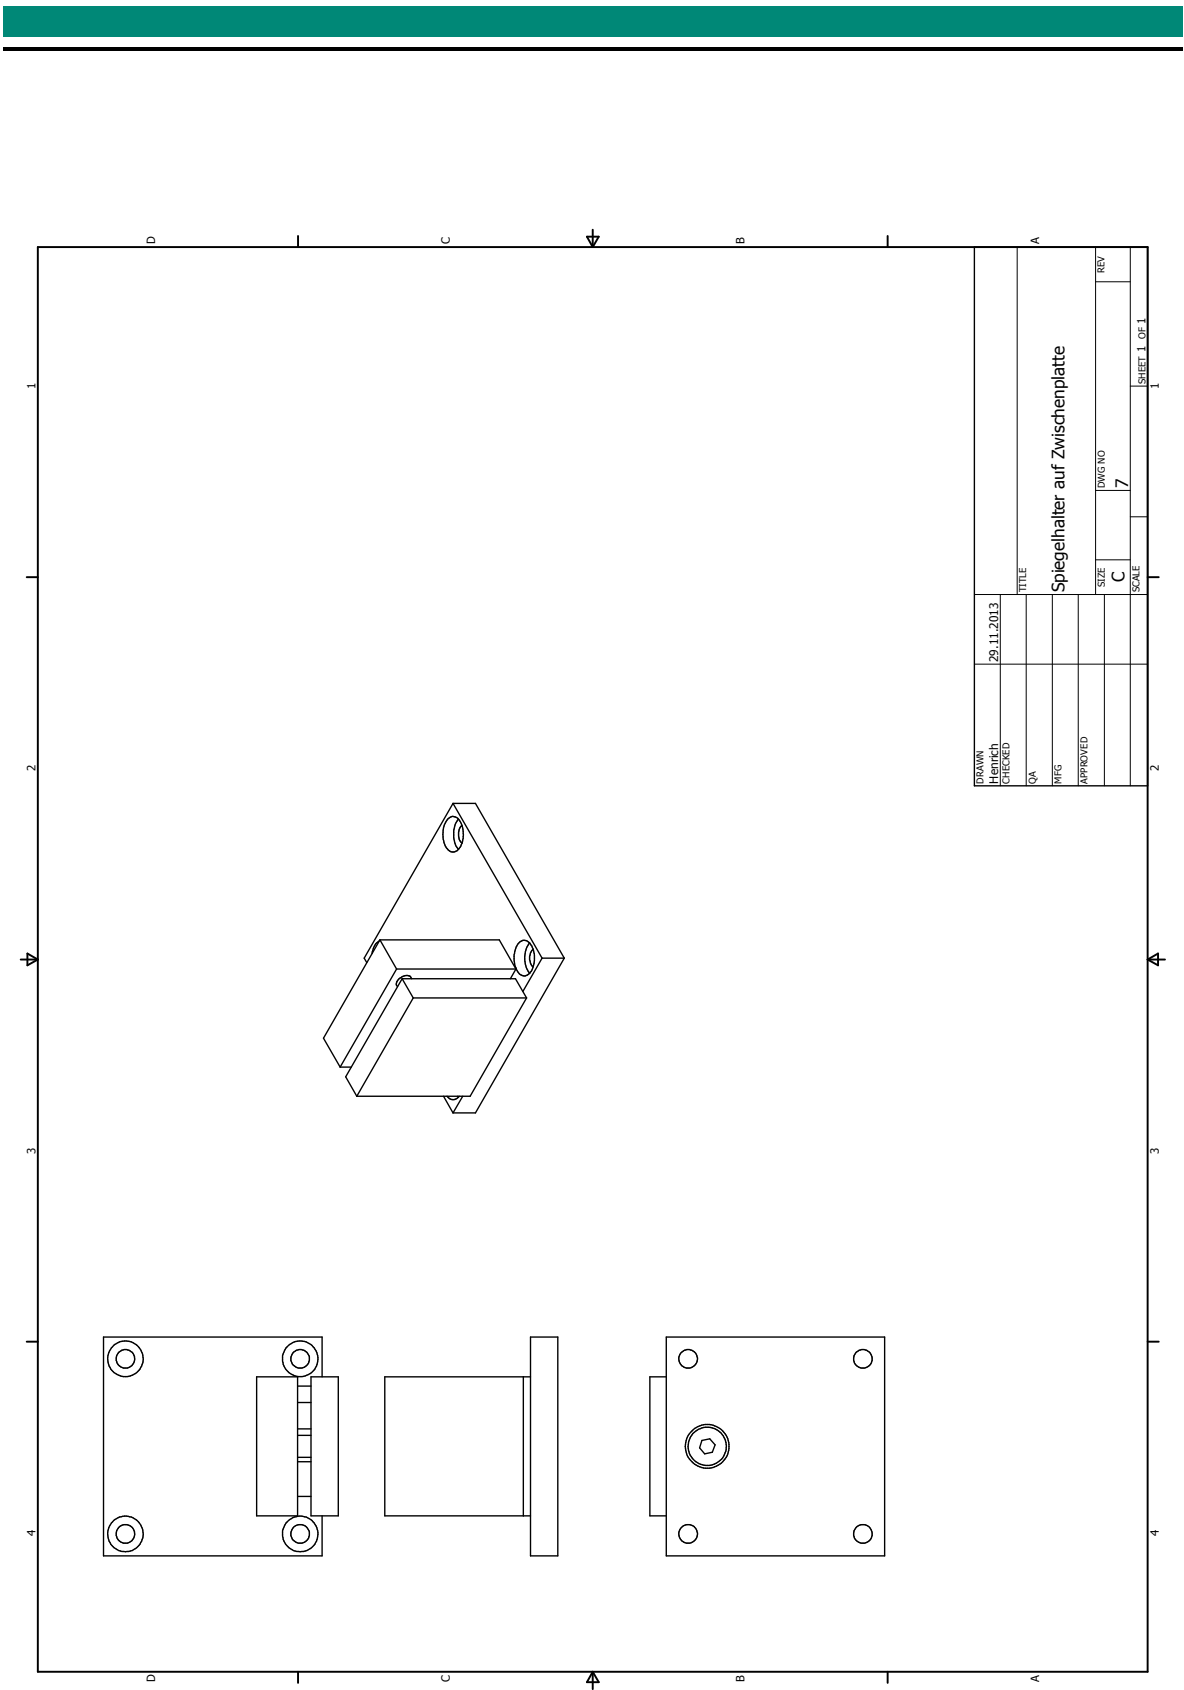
Technical drawing of the mirror mount on the adapter plate.
